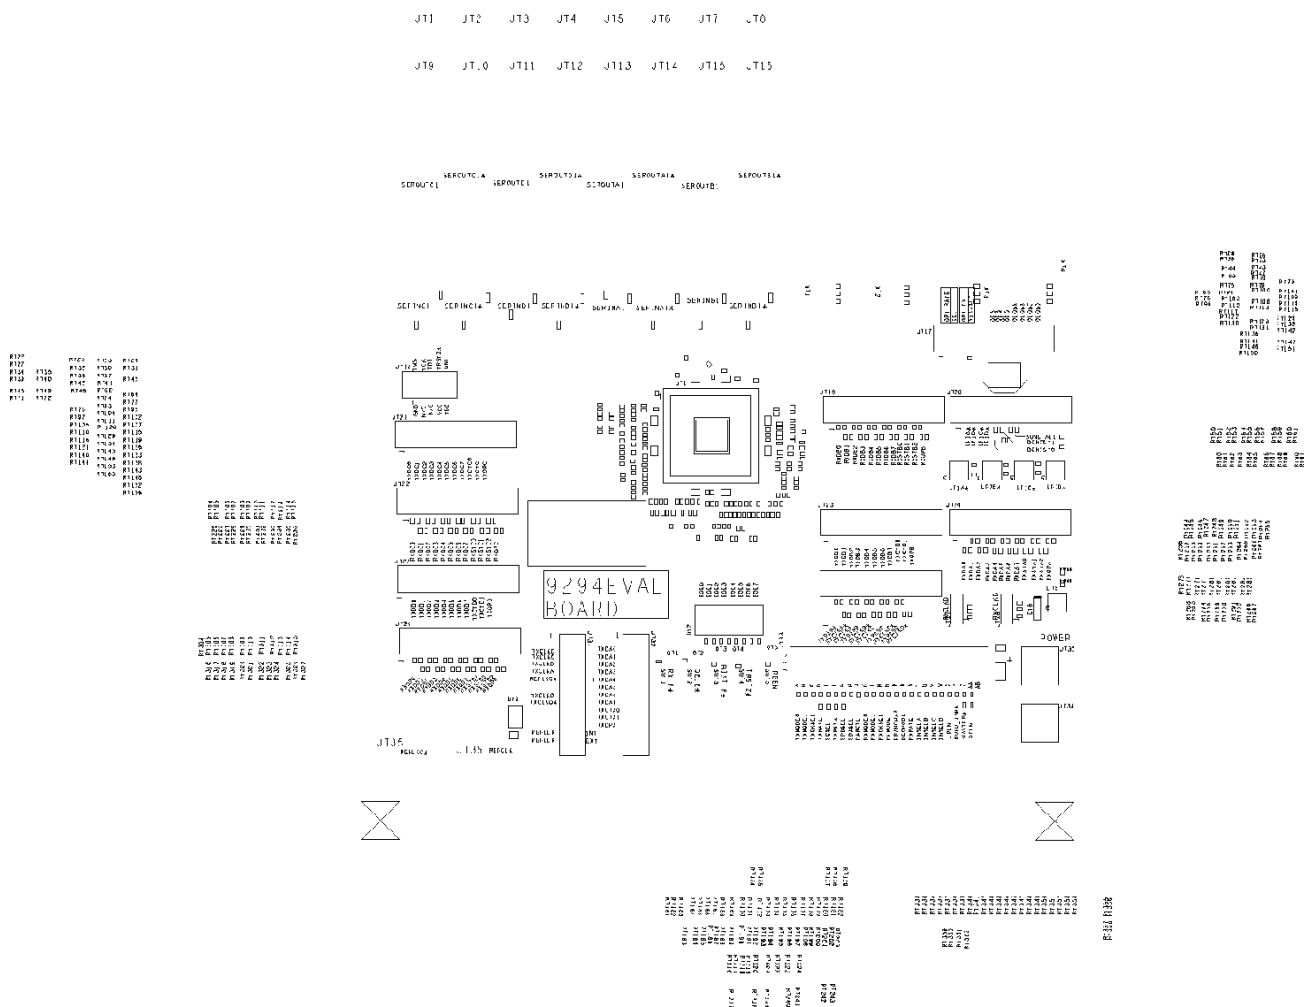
CYP15G0401DXB Eval Board Top Silk Layer
